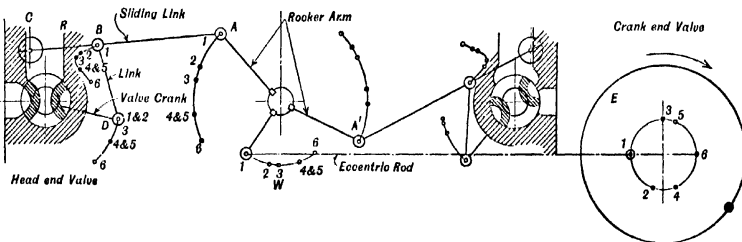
Line Diagram of Ideal Corliss Valve Gear.
